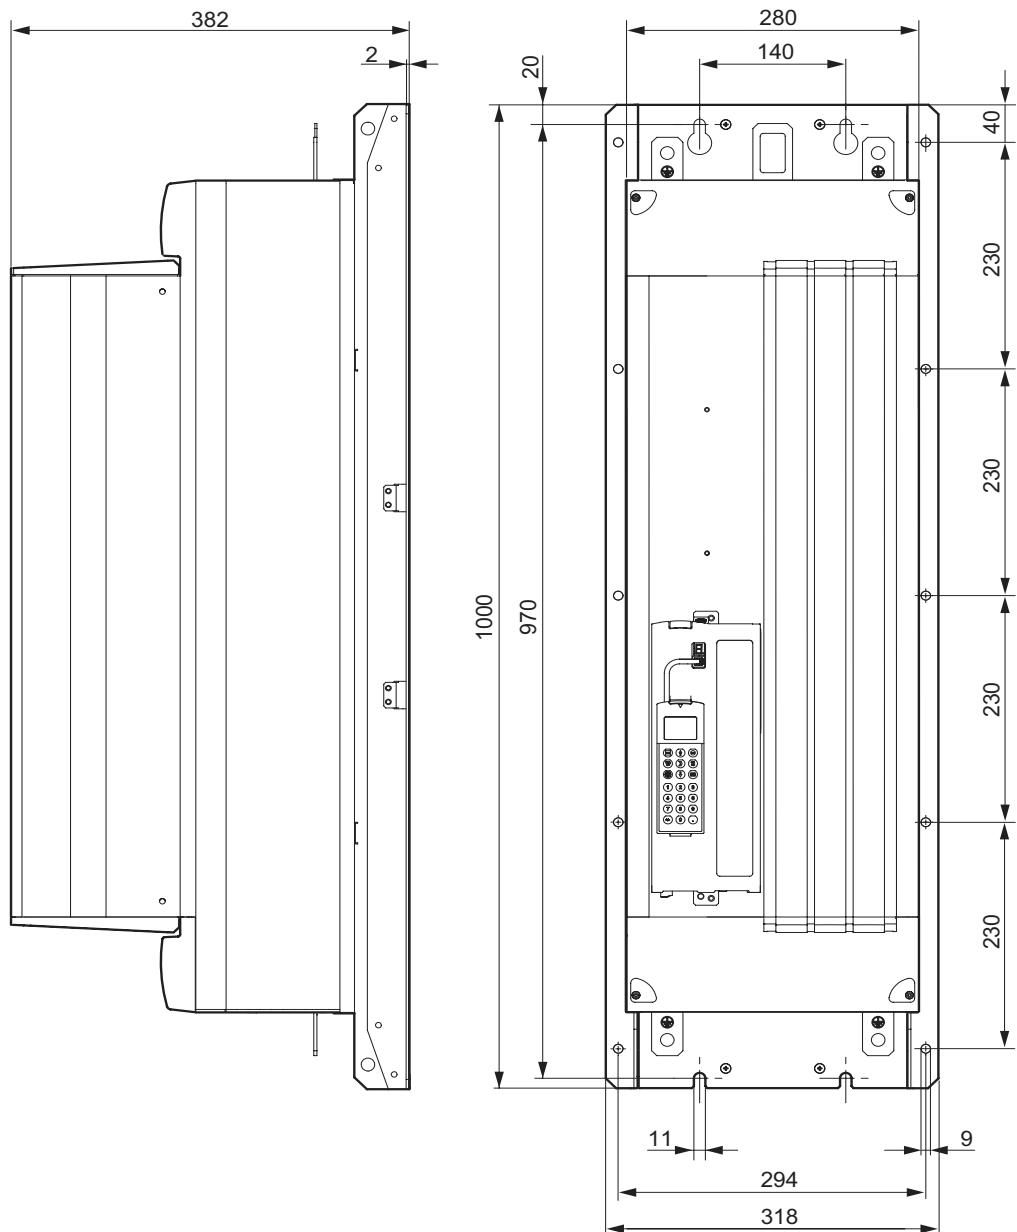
Dimension drawing for MDX61B size 5, dimensions in mm
